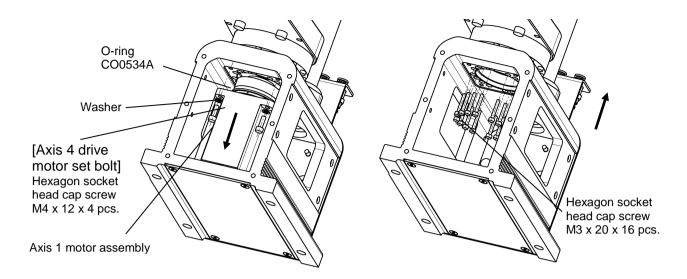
Dismounting axis 1 motor assembly and Arm 1 (KHL-300, KHL-400)
